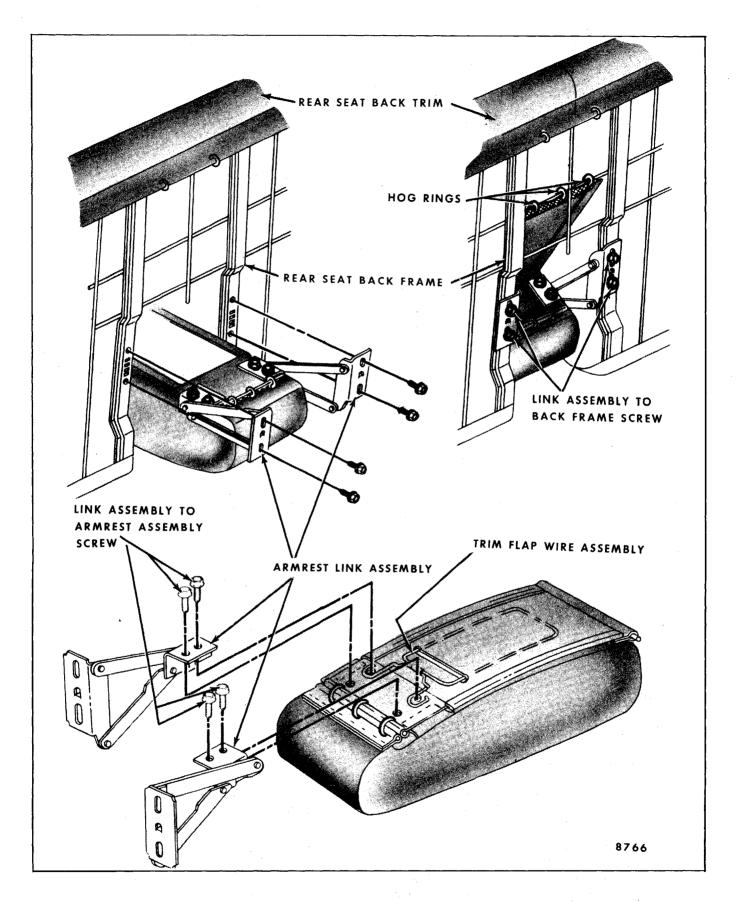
Rear Seat Back Center Armrest Installation - K Style
